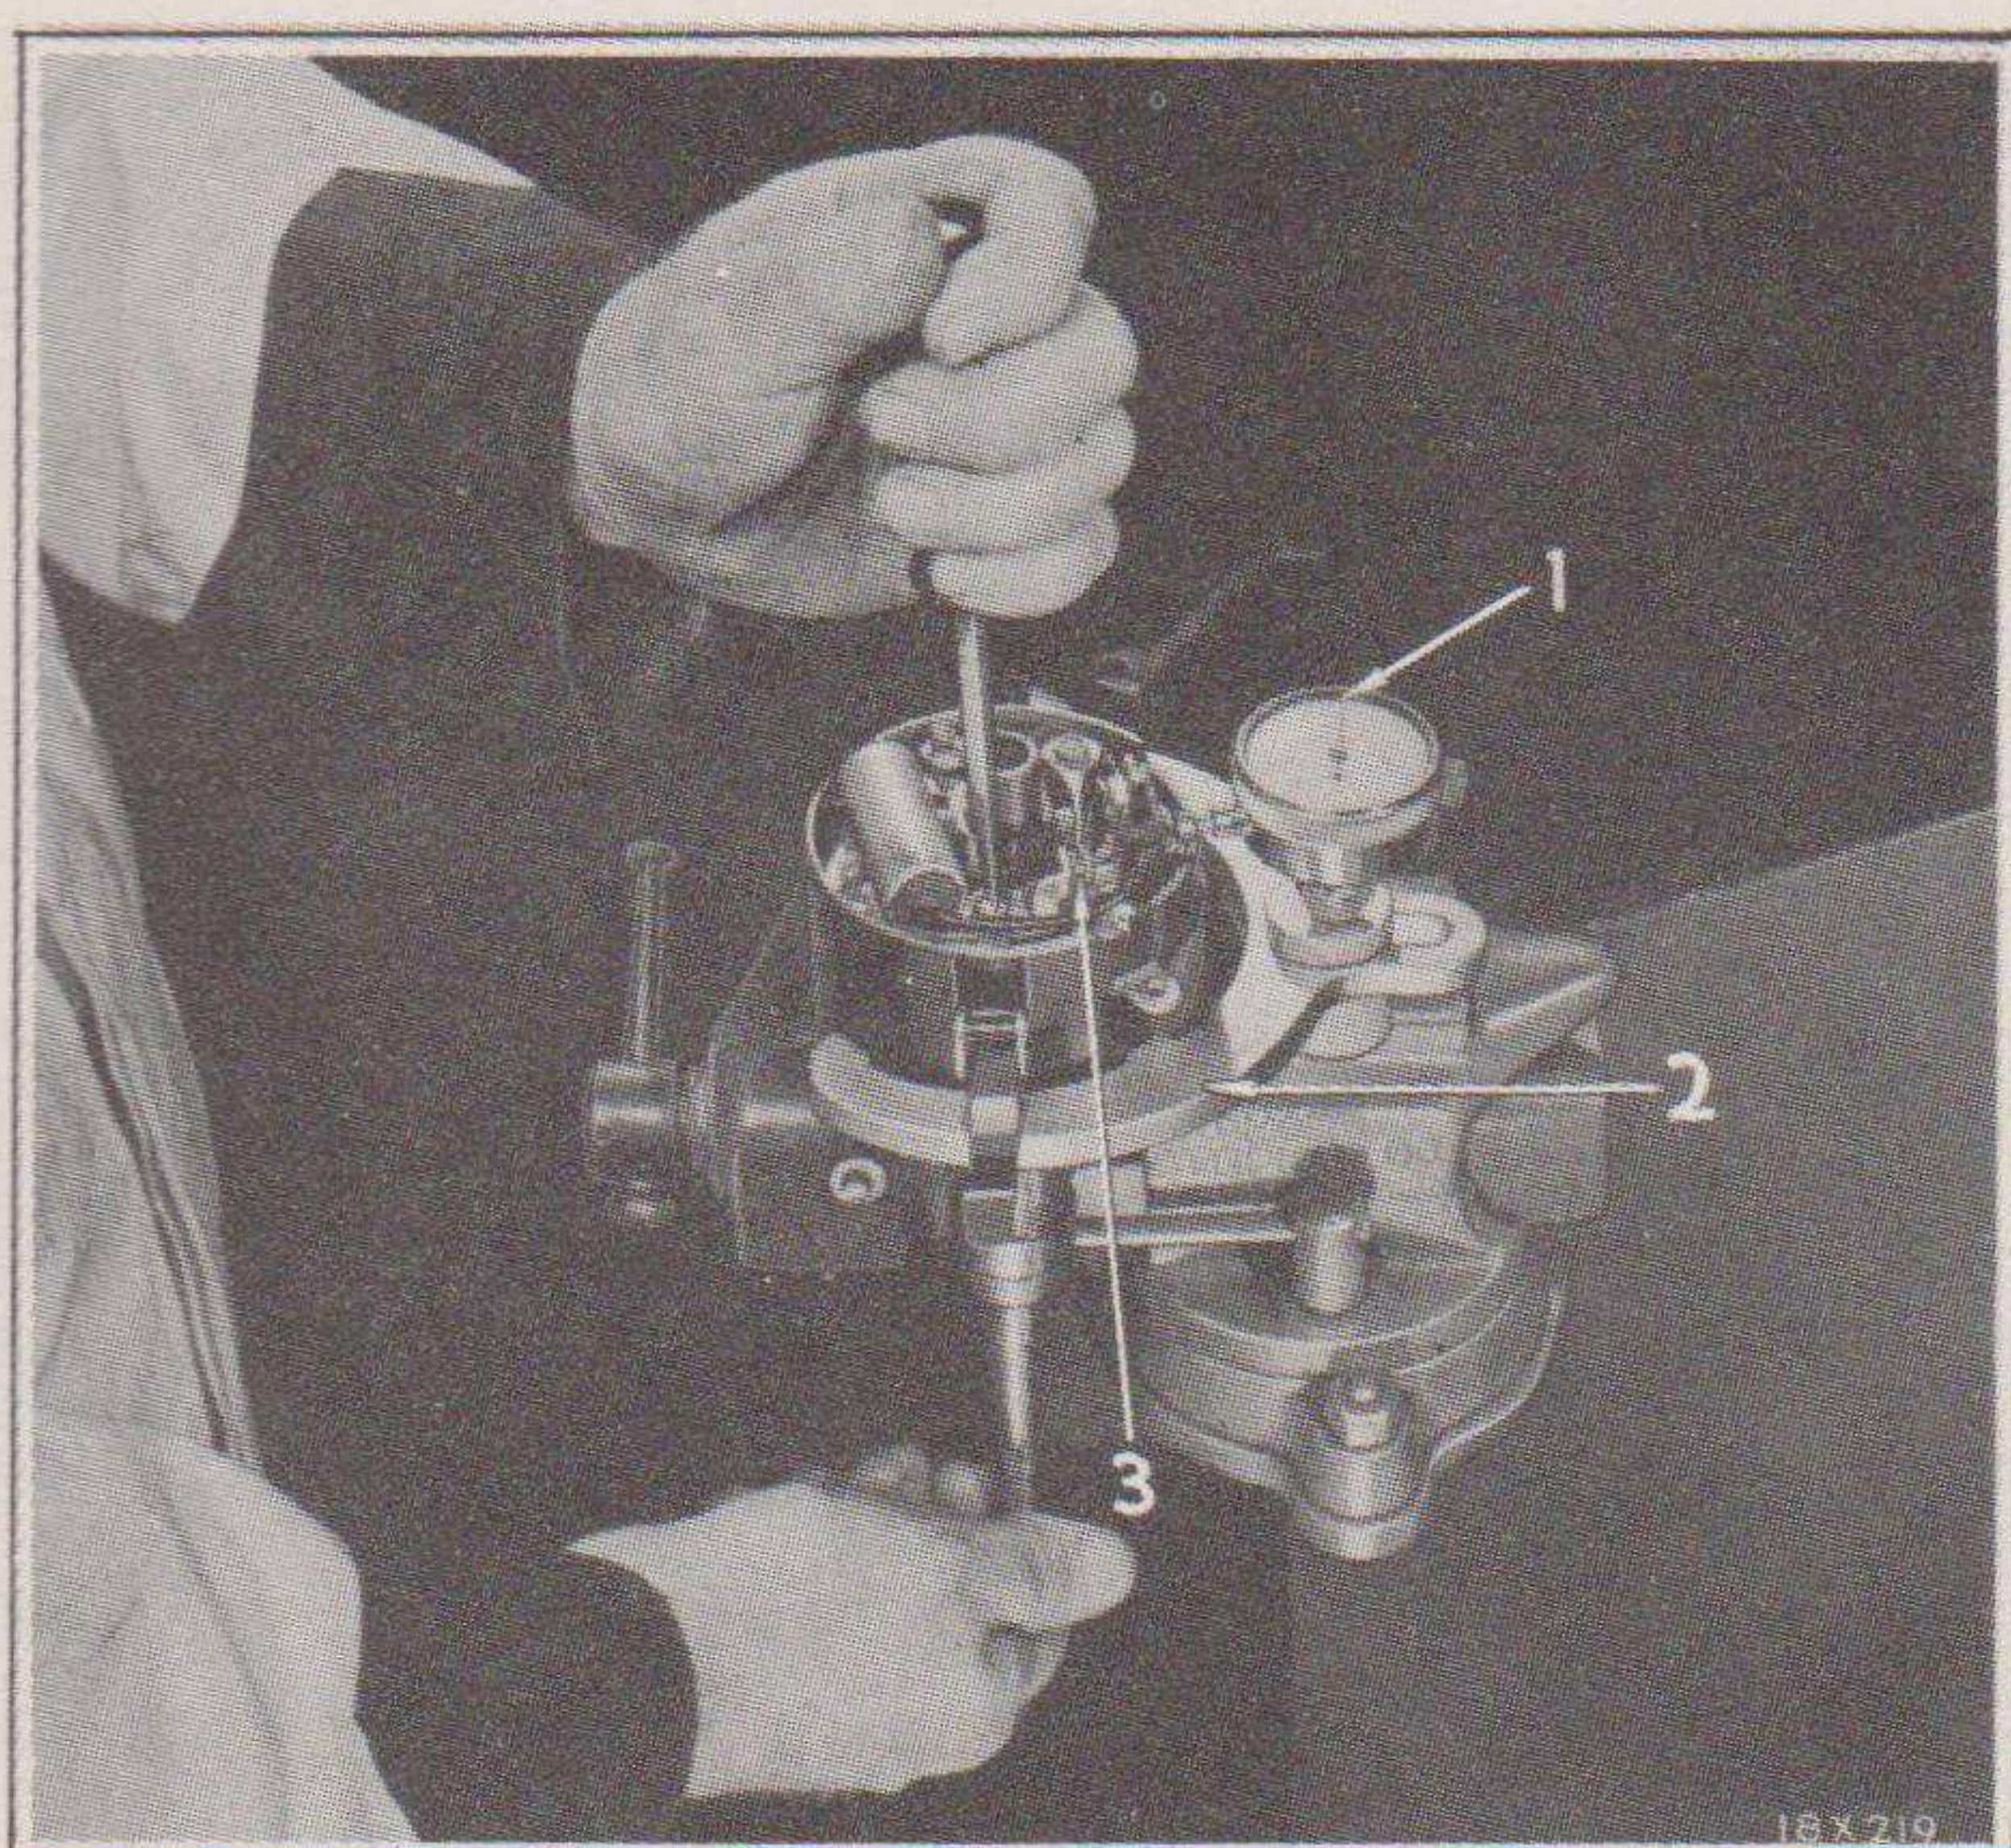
Setting Distributor Point Gap with Dial Indicating Fixture (Tool MT-166)
